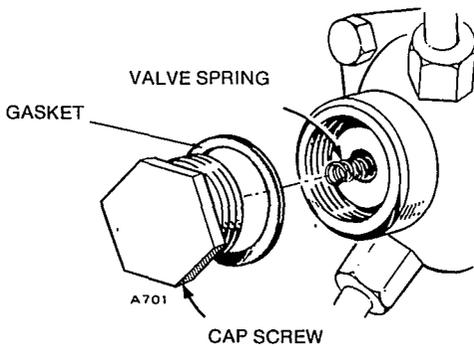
EARLY MODEL DELIVERY VALVE HOLDER
